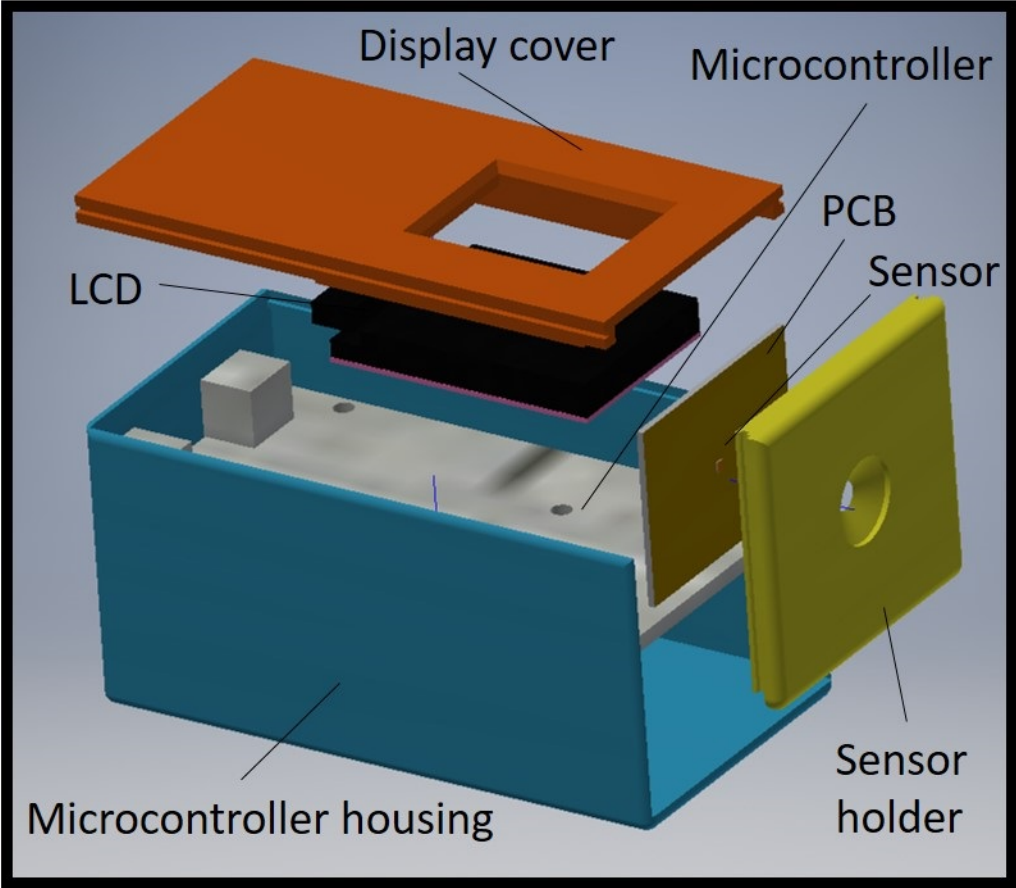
Expanded view of the biosensor packaging illustrated in Fig. 3.9.
